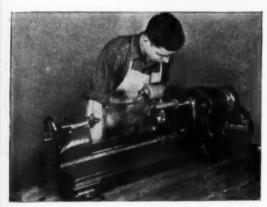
Here is a 1/14th hp unit, grinding lathe centers. This is just one of many useful applications of the versatile portable grinder.
